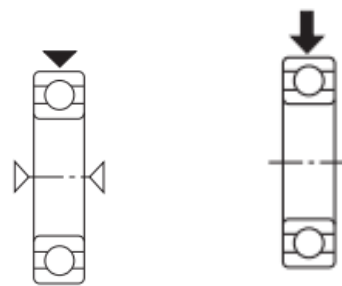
Loading in Deep groove ball bearing (Axial and Radial with Axial combined) [8]
